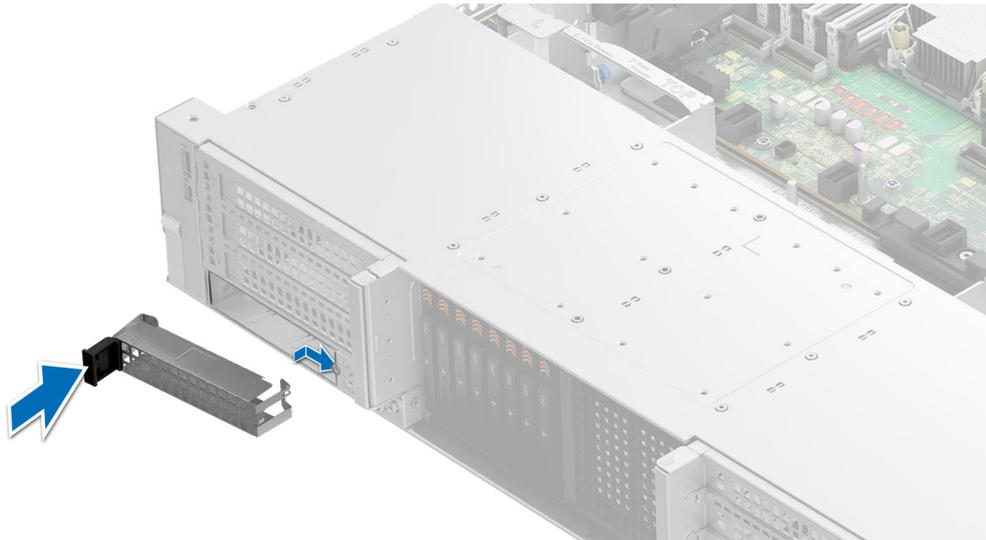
Installing a BOSS-N1 DC-MHS controller filler bracket
